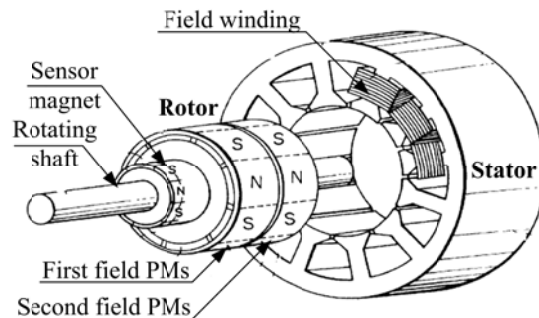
PM motor with rotating rotor parts: view where the magnetic poles are not shifted [80]
